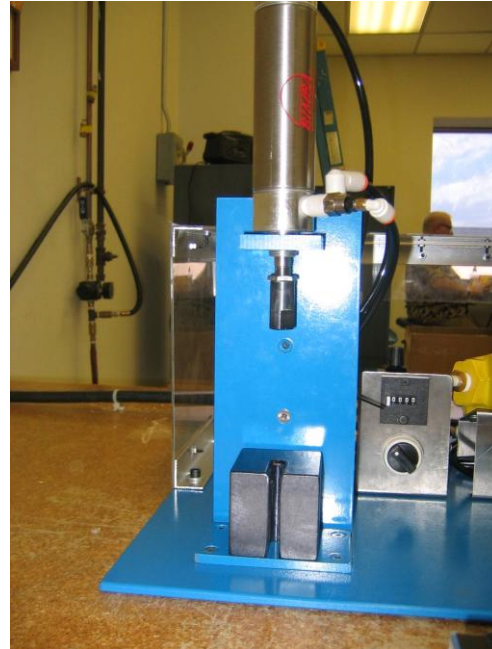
shows some comparisons between the existing and newly designed assembly devices. It is clear that the new designs reduce the manual aspect of assembly as well as the number of parts required
